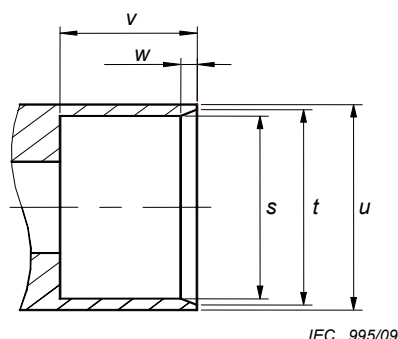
Gauge for outer contact of socket connector (for dimensions, see Table 3)
